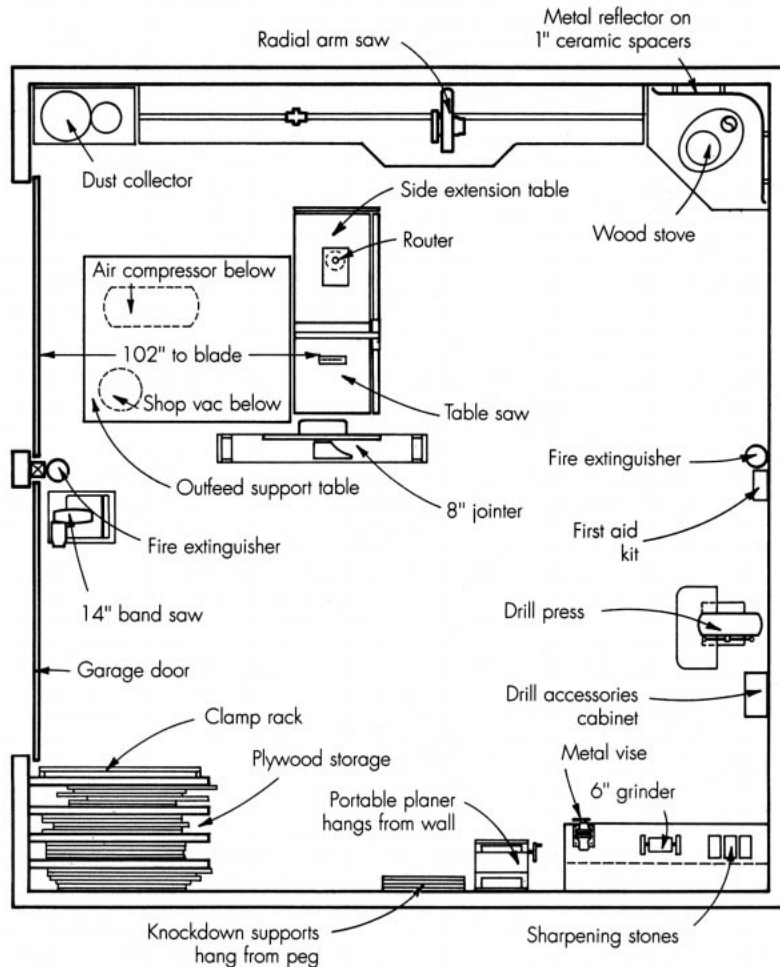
The author's small shop layout leaves as much open floor space as possible. Knock-down tables, and even a portable surface planer, hang from the walls when not in use.
